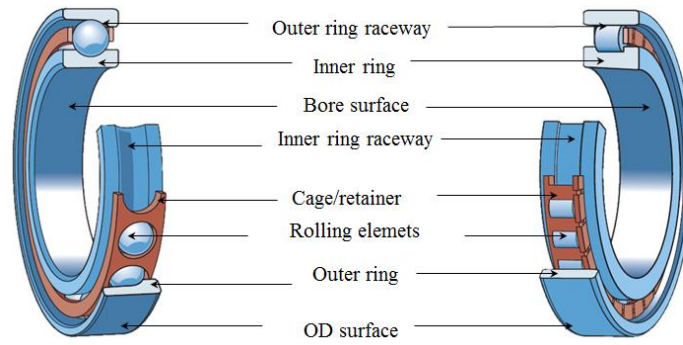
Main parts of two rolling bearing commonly used in spindles. Angular contact ball bearing (left) and cylindrical roller bearings (right). Adapted from [Courtesy:SKF]
